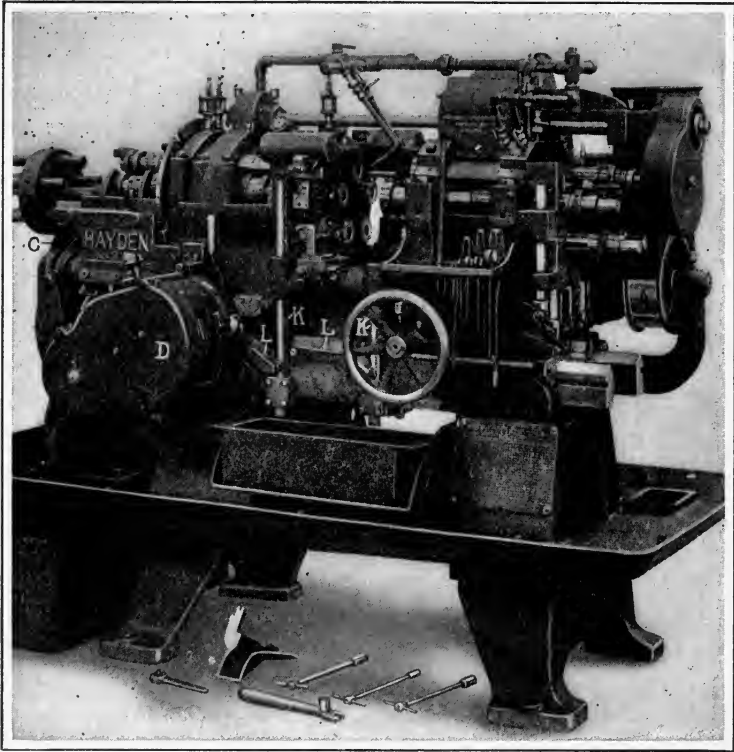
Hayden Five-spindle Automatic Screw Machine
